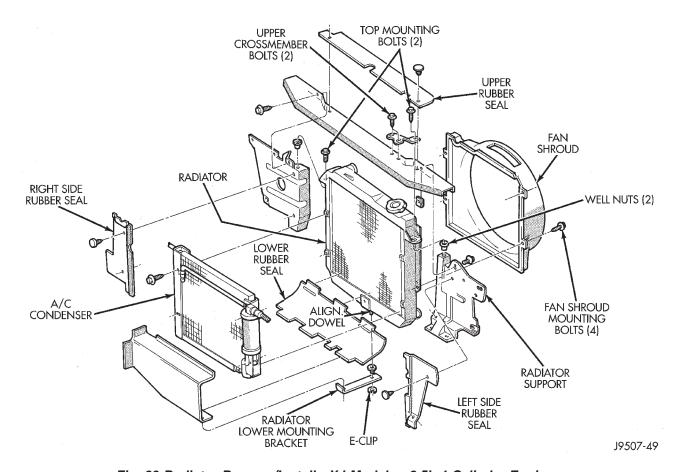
Radiator Remove/Install—XJ Models—2.5L 4-Cylinder Engine
